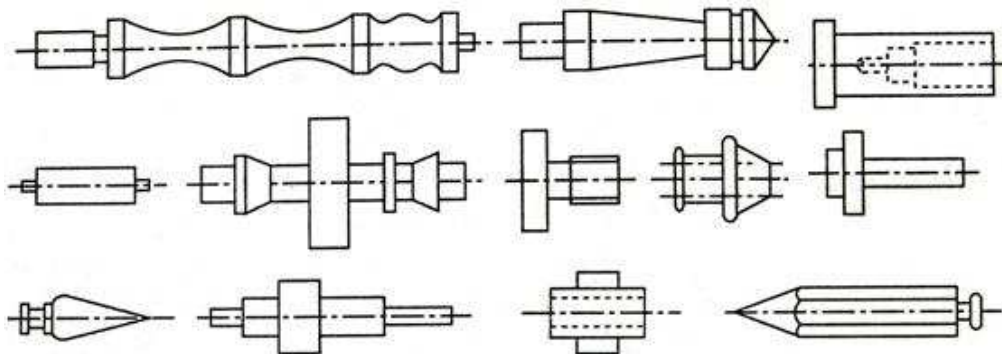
Parts produced on single spindle automatic screw cutting machine
